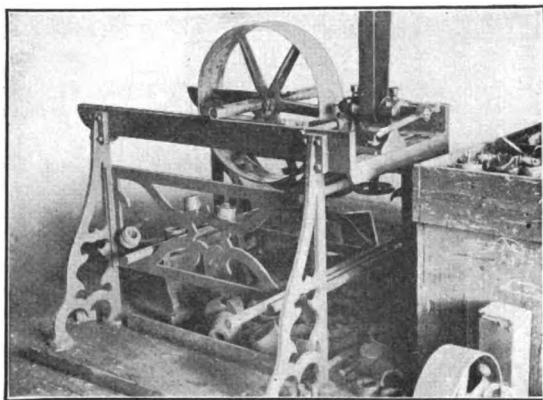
BALANCING WAYS WITH DRILLING ATTACHMENT
